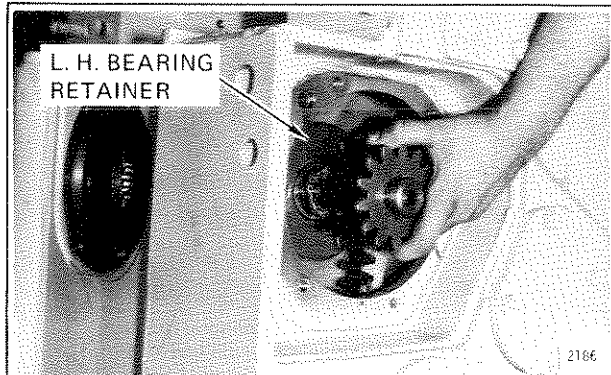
BEVEL GEAR AND BRAKE SHAFT, LOCATION OF COMPONENTS
